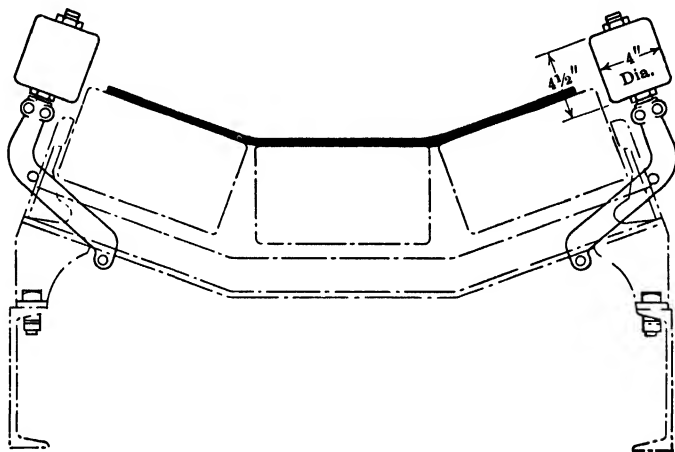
Side Guide Idler Clamped to Carrier Stand.
